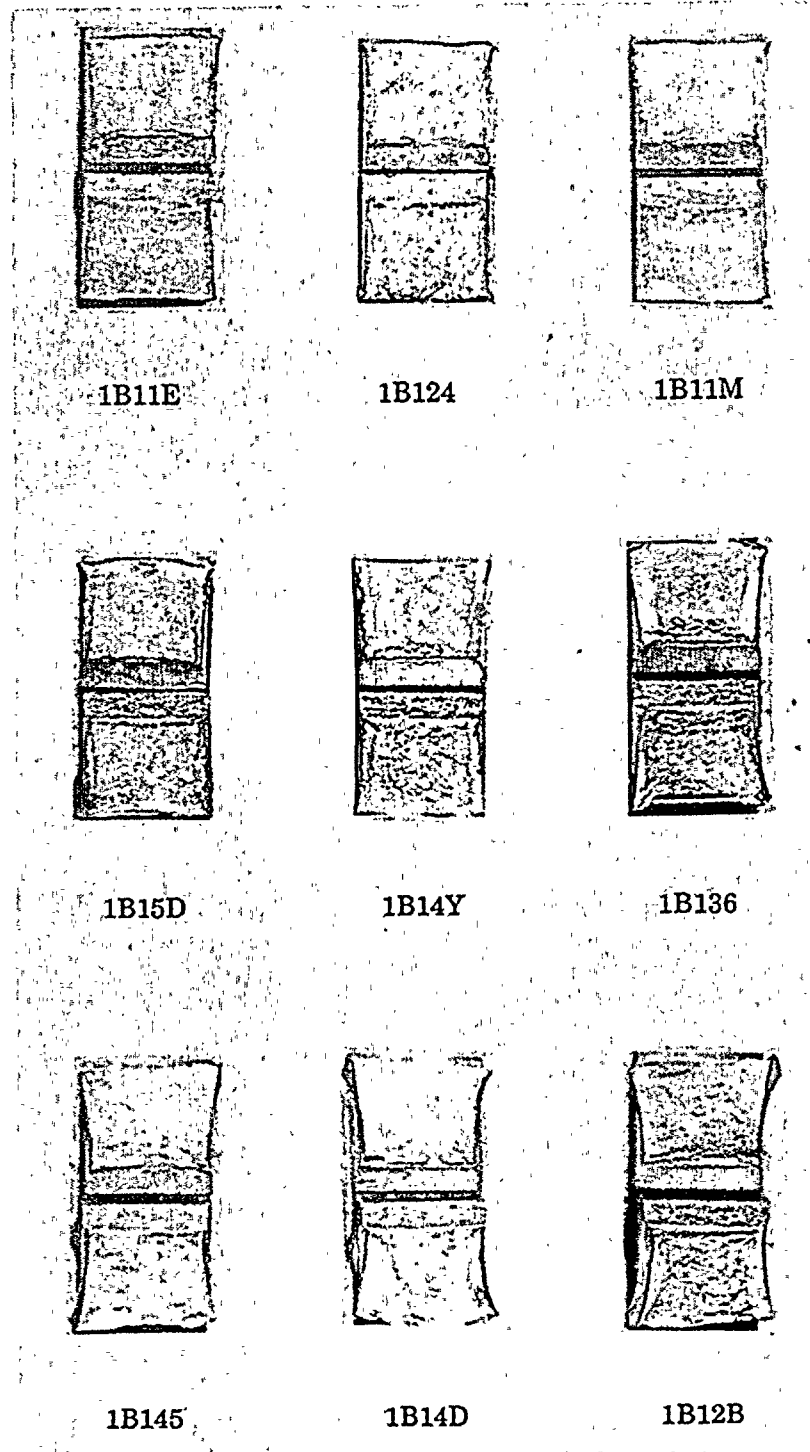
Charpy Impact Specimen Fracture Surfaces for Palo Verde Unit 2 Reactor Vessel Lower Shell Plate F-773-1' (Longitudinal Orientation)
